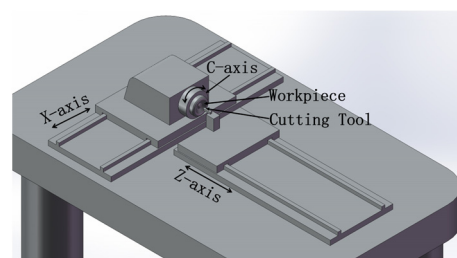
Ultra-precision slow tool servo diamond turning machine model.
